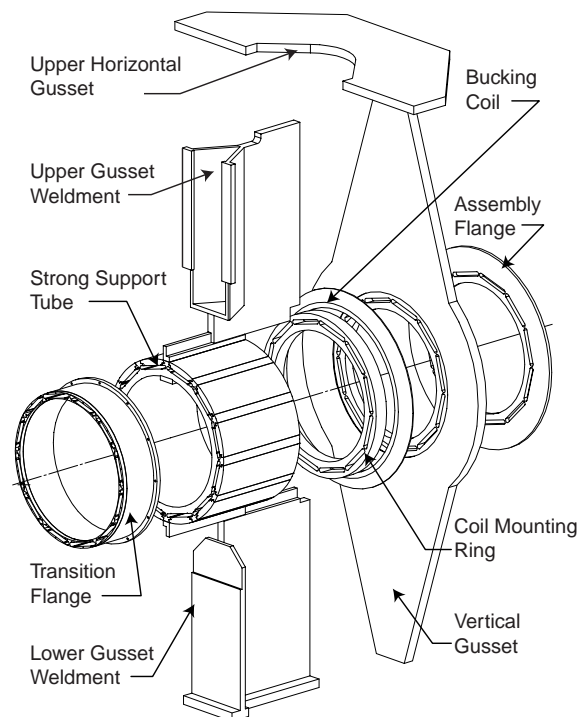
Exploded view of the Strong Support Assembly. Missing from the figure are the Stand-off Box in the rear, and the Central Support Tube in the front.
